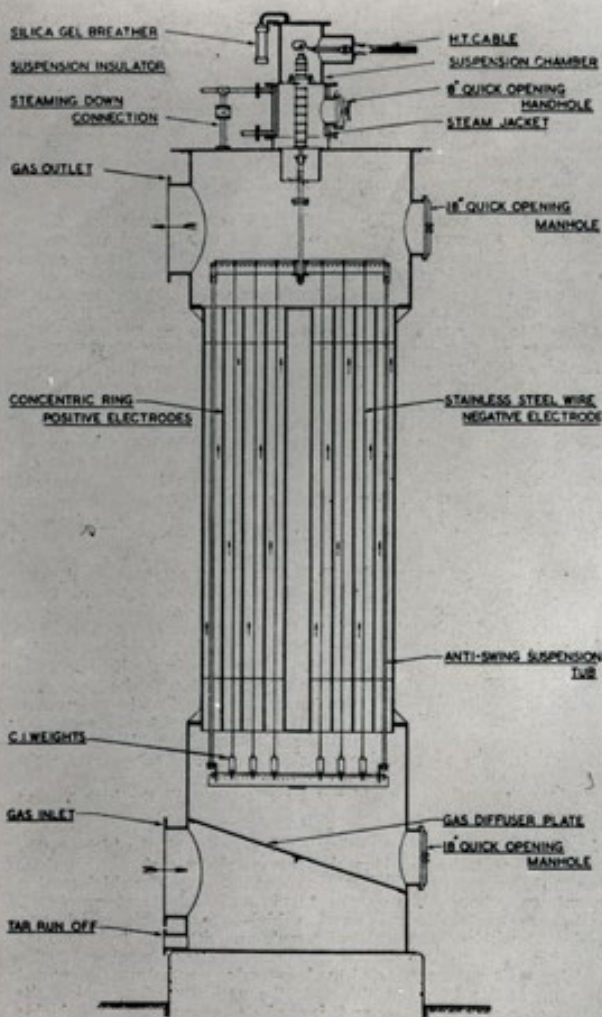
Sectional Elevation Drawing of Holmes-Elex Plate-type Electro-detarrer. (By courtesy of the makers.)
